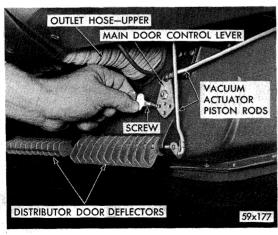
Locating Main Door Adjusting Screw (Imperial)
